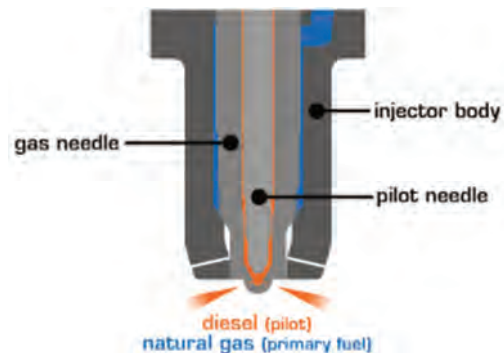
Scheme of Westport company HPDI Injector Tip Assembly (reproduced from [33])
